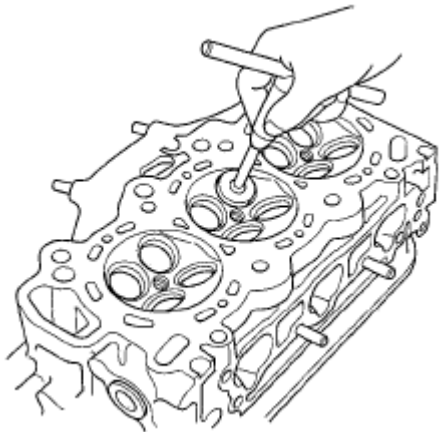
Inspecting Valve Stem-To-Guide Clearance
